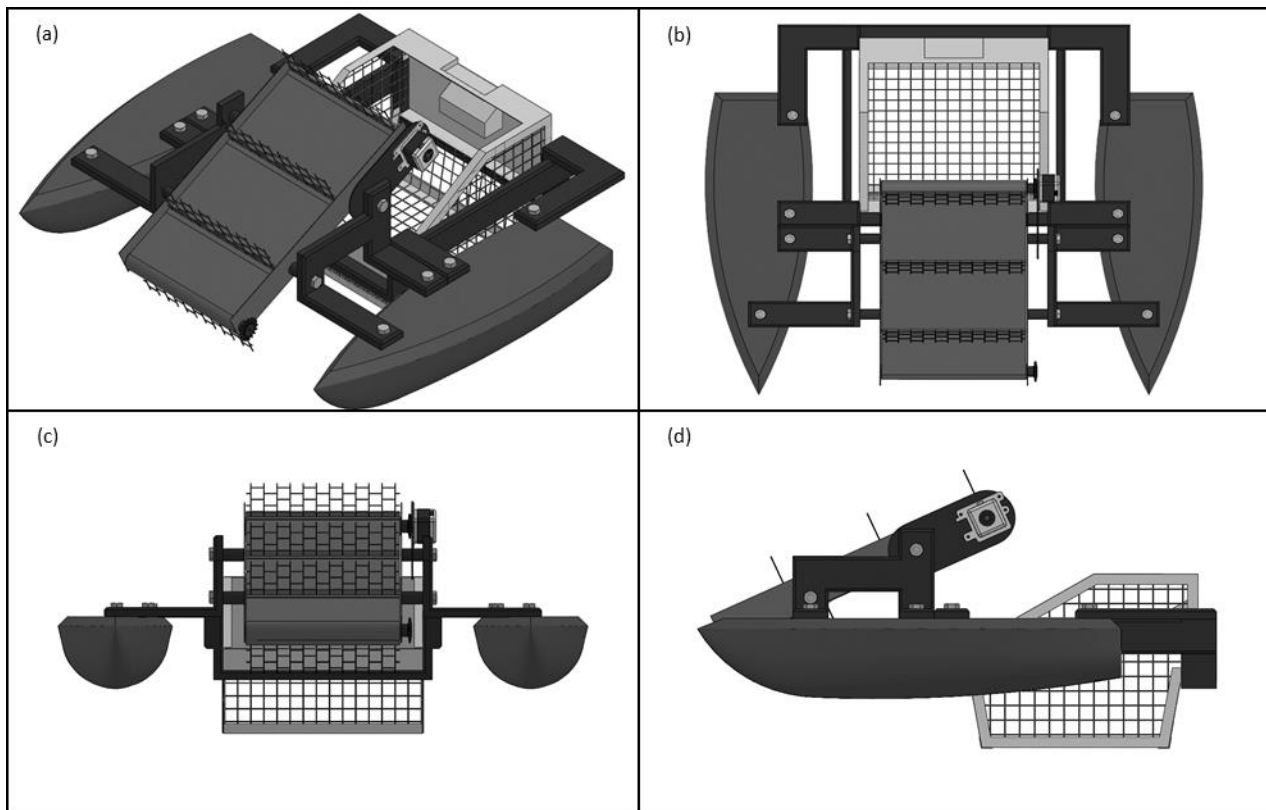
(a) Isometric view (b) Top view (c) Front view and (c) Side view of trash collector boat
